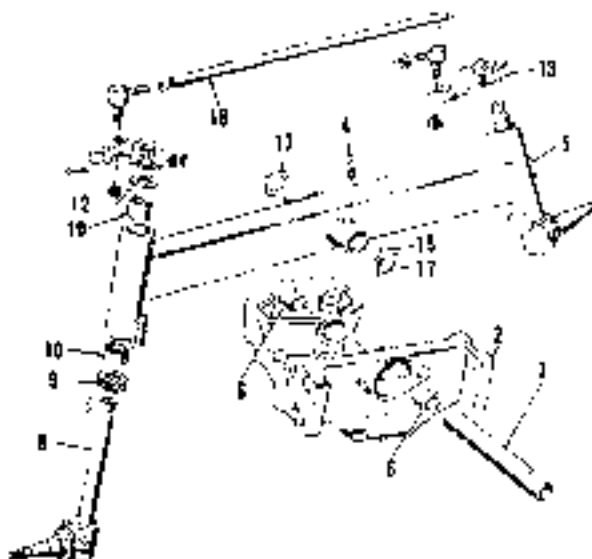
Exploded view of adjustable front axle assembly used on Models MF240 and MF250. Refer to Fig. 2 for legend except for the following:
